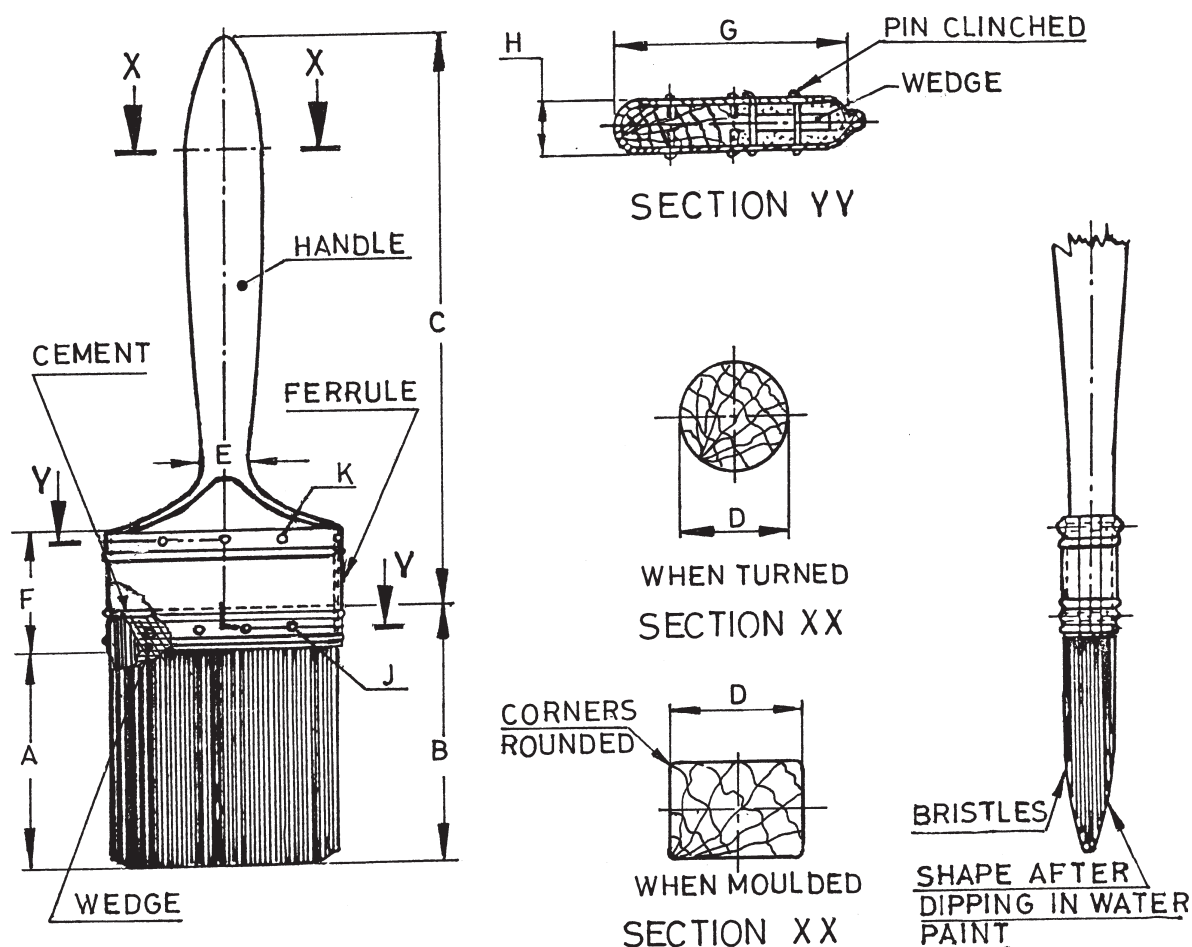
SHAPE AND DESIGN OF BRUSHES, PAINTS AND VARNISHES, FLAT
